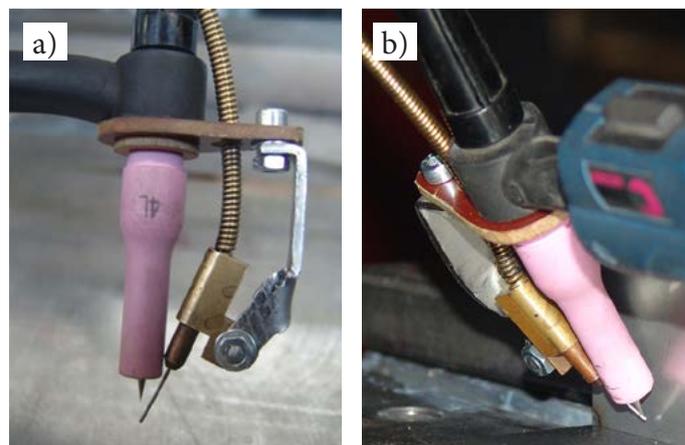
Modernised wire feeder fixed on the TIG welding torch of the LORCH V40 AC/DC welding machine: a) main view; b) position during the welding of a T-joint
